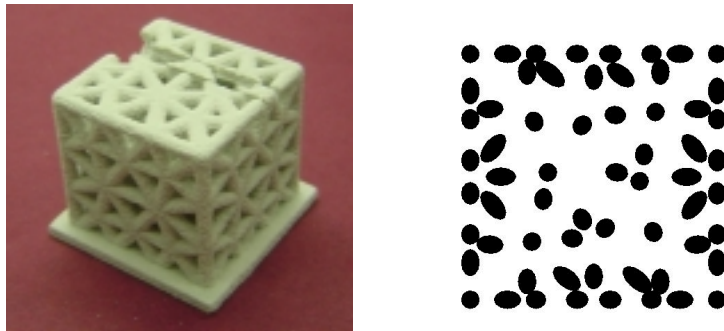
Patterning Truss Structure: (a) trussed cube, (b) characteristic cross-section
